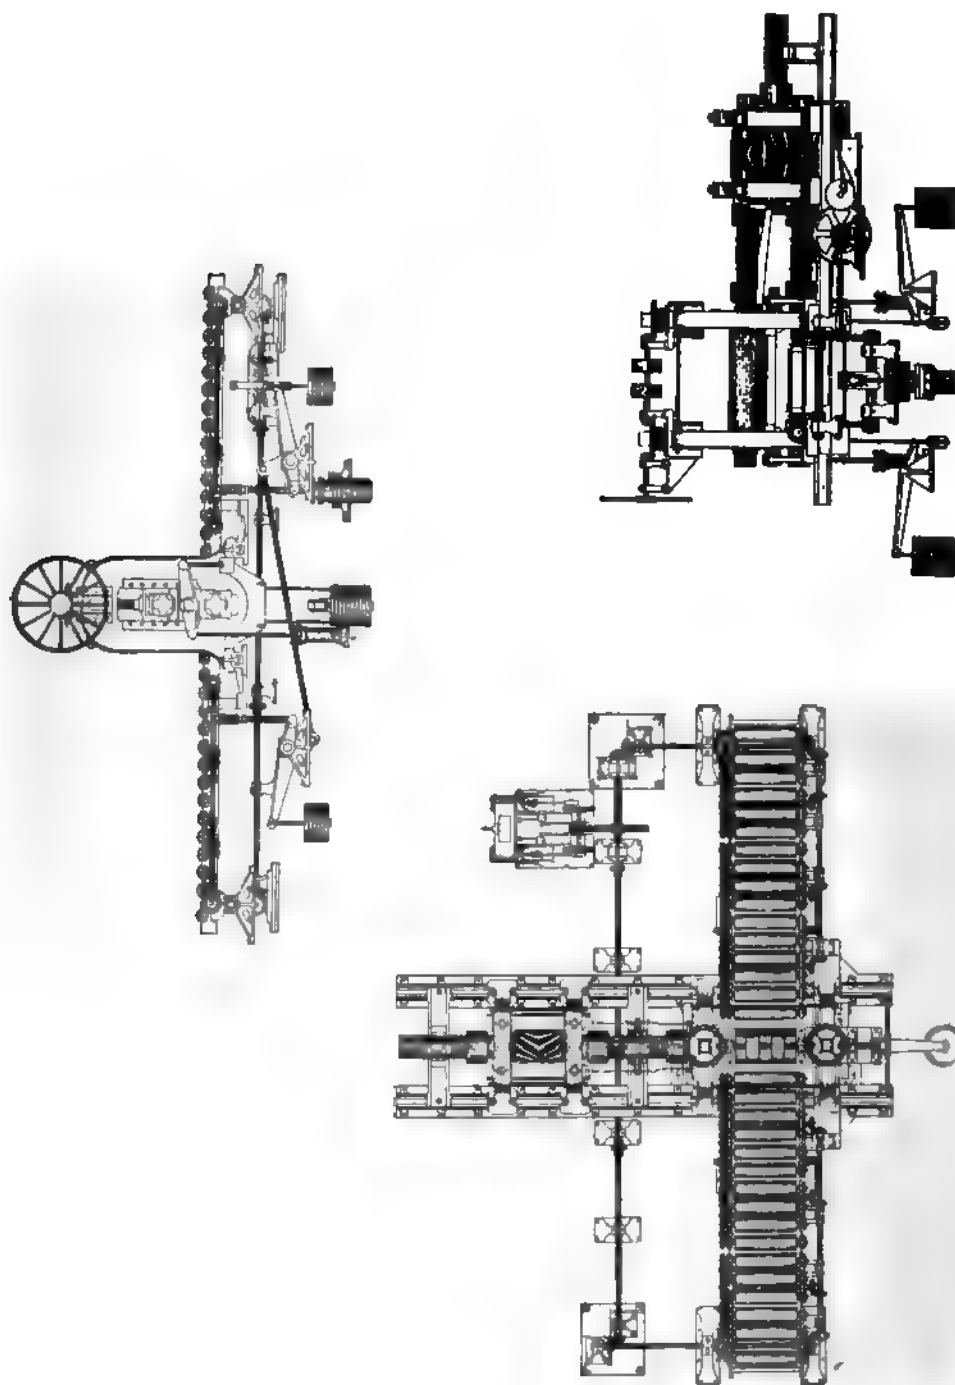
DETAILS OF THREE-HIGH PLATE MILL.
